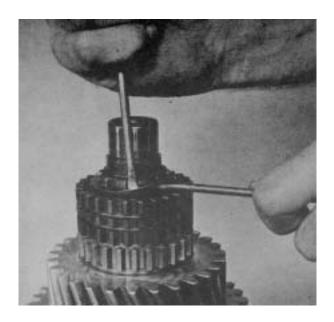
Remove 4th & 5th shift hub sleeve retainer ring.
